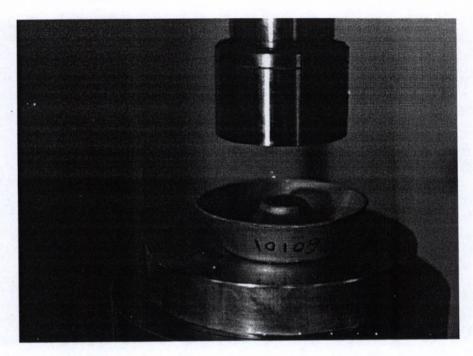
Photograph showing Specimen 60101 after 22 mm of axial crushing (mode III).
